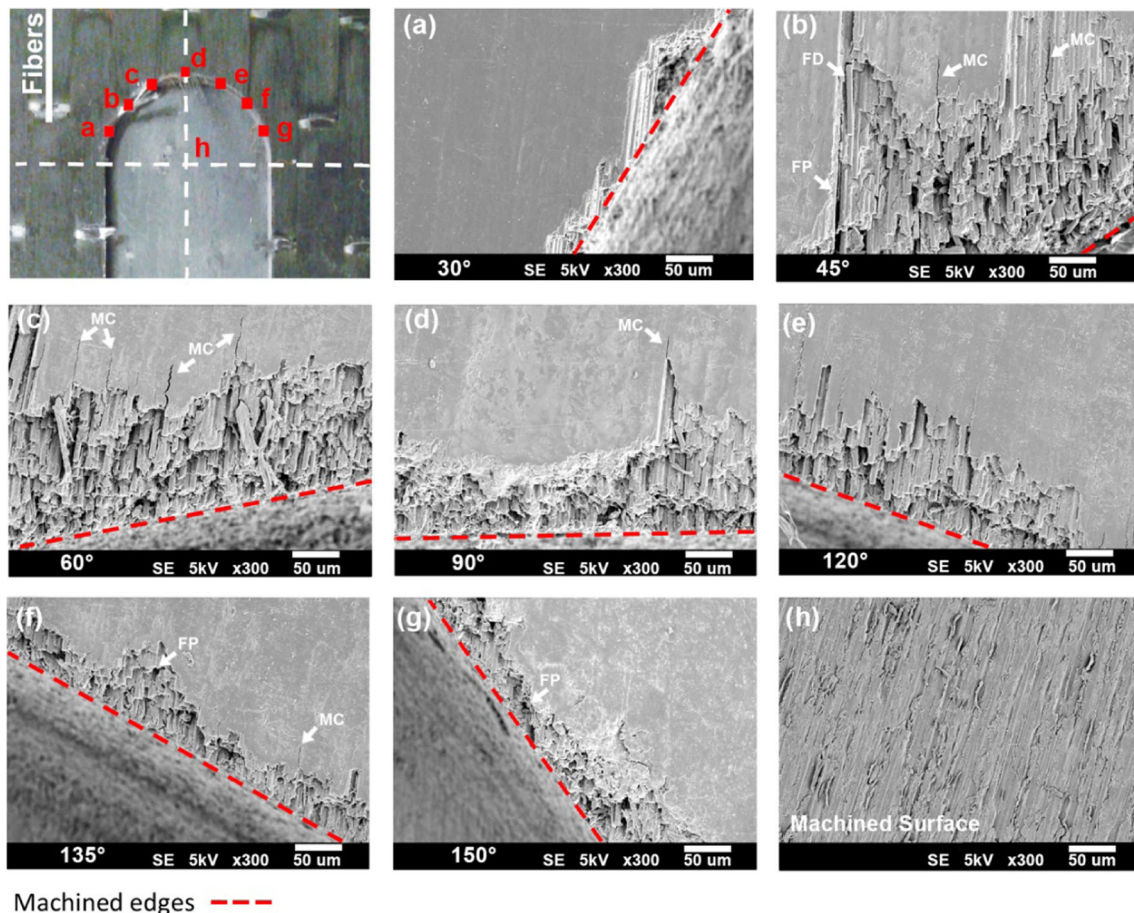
Machining damage at different tool rotation angles: fiber pullout (FP), fiber/matrix de-cohesion (FD), matrix cracking (MC)
